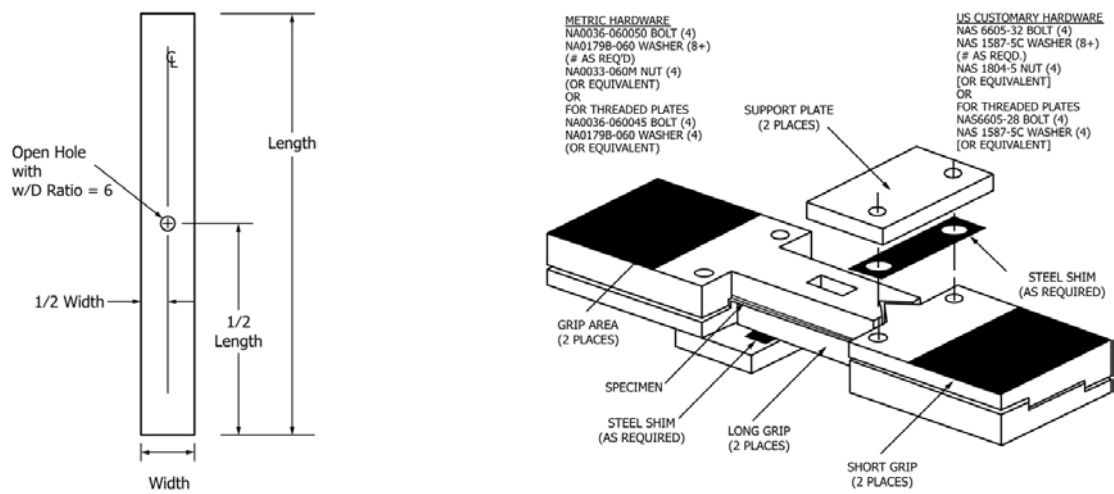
ASTM standards for OHT and OHC testing. (a) Schematic of OHT test specimen [17]. (b) Support fixture assembly for OHC testing [18].
